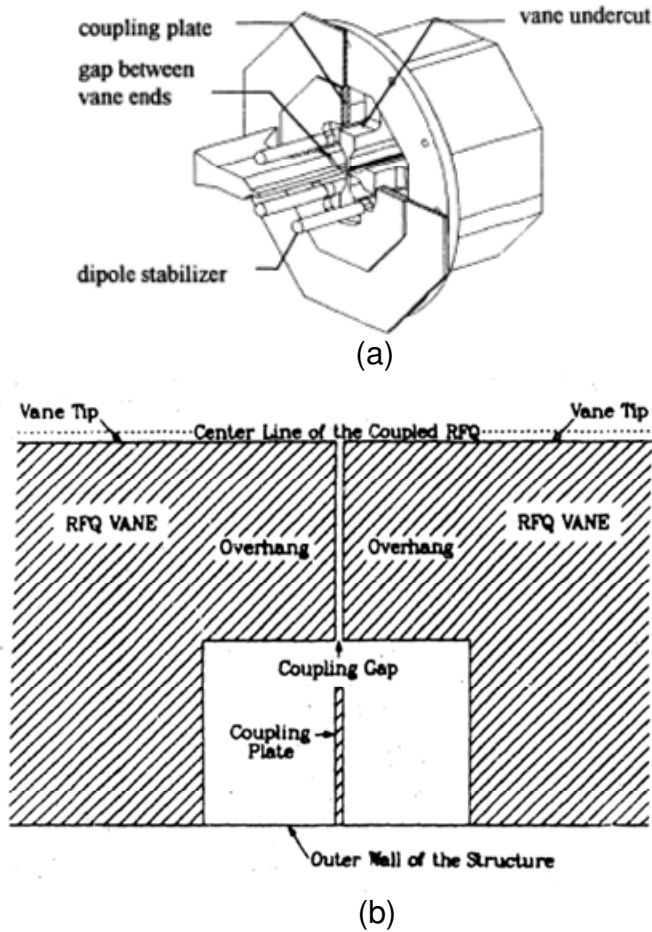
Coupling cell design: (a) perspective view, (b) cut-view - After [13][14].
